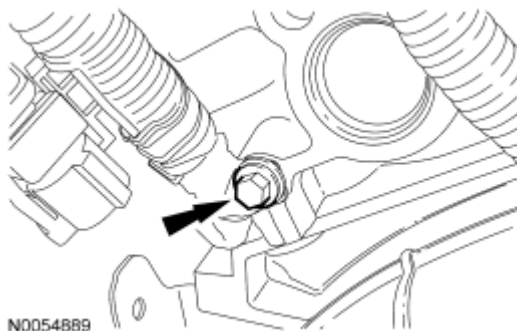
Identifying Wiring Harness Retainer Bolt From Rear Of LH Cylinder Head
